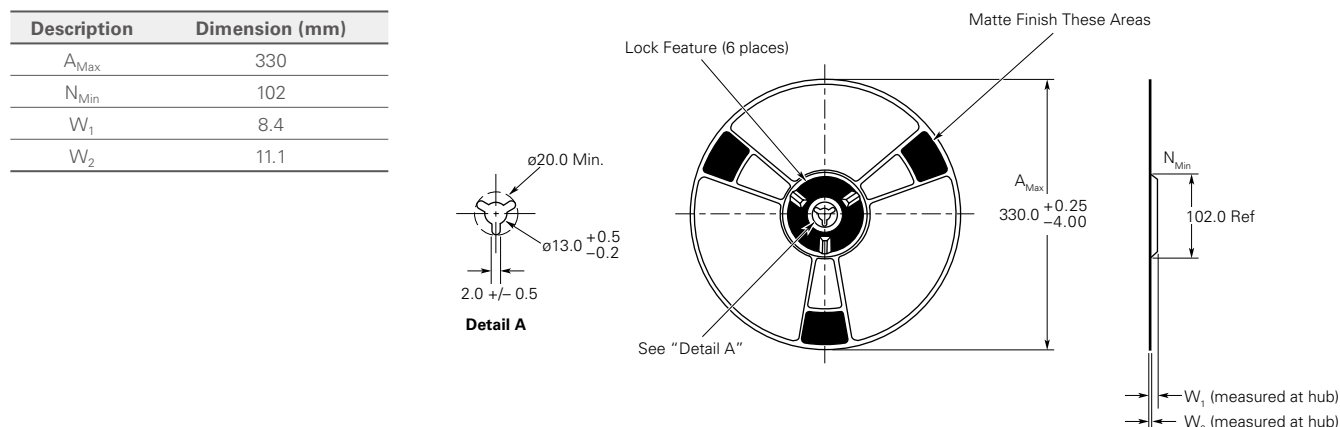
EIA Referenced Taped Component Dimensions for ZENxxxVyyyAzzYM Devices in Millimeters (mm)
